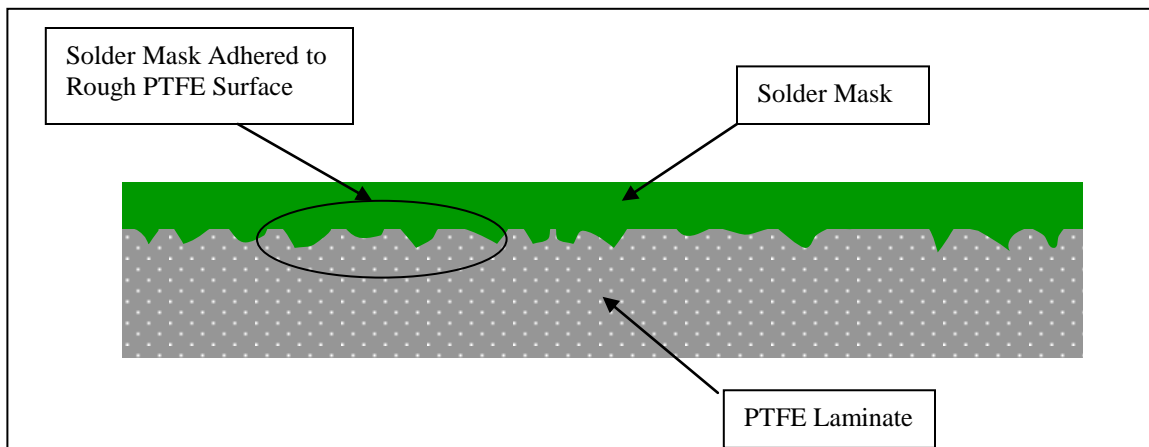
Illustration of soldermask wetting and adhesion to rough PTFE surface.
